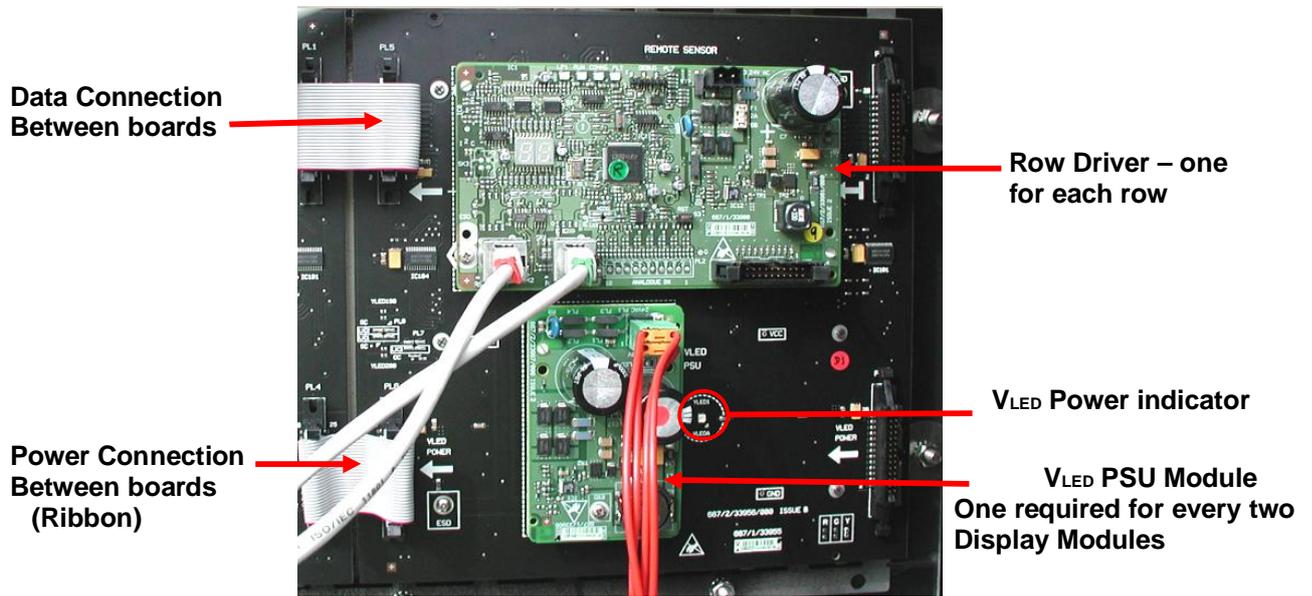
240mm Character PCB Assembly (Yellow) – Viewed from Rear
